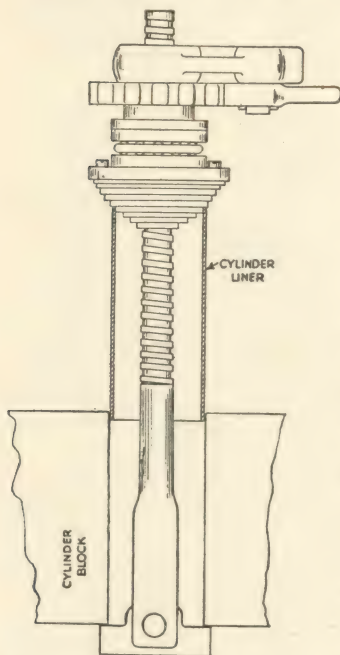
THE BUMA CYLINDER LINER TOOL, SHOWN INSERTING A LINER
